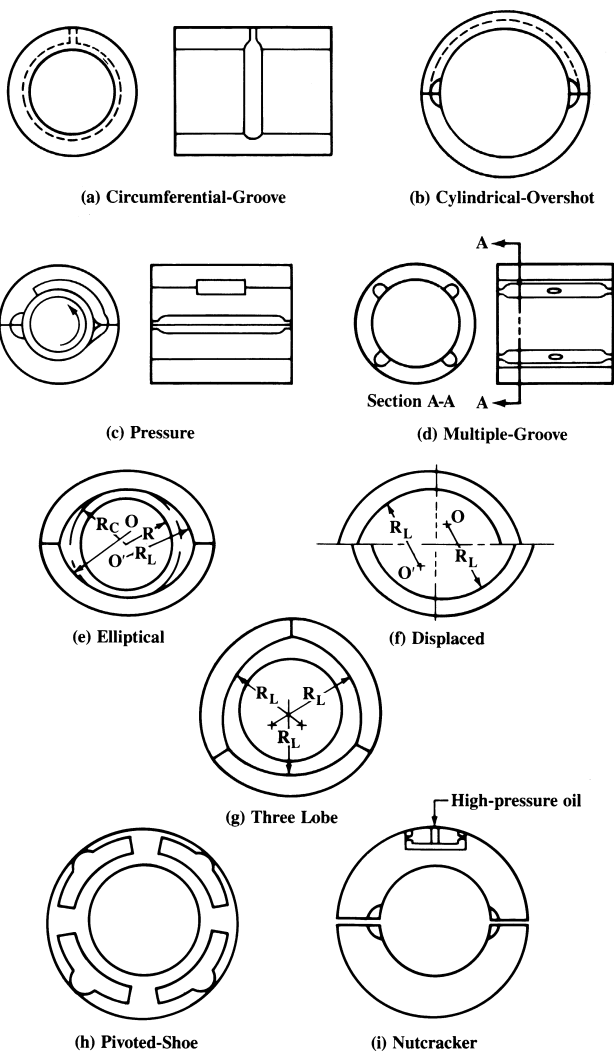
Typical shapes of several types of pressure-fed bearings.
